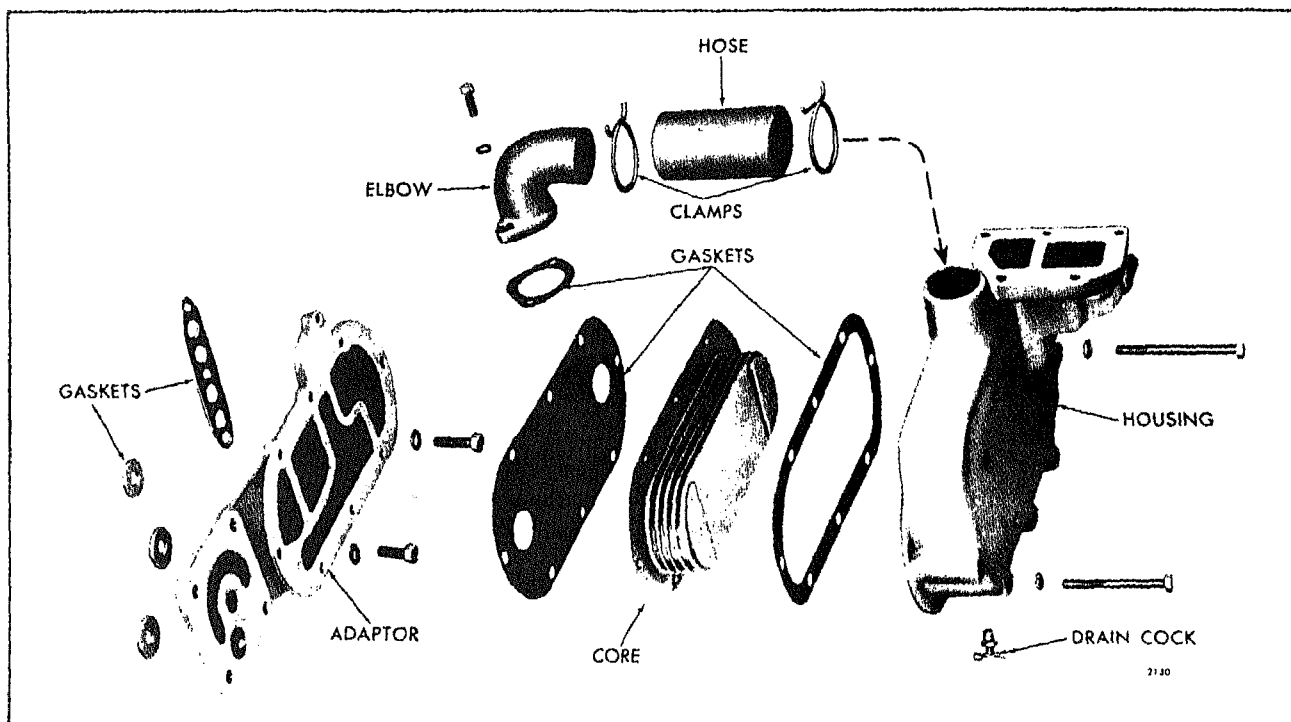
Oil Cooler Details and Relative Location of Parts (In-Line Engine)
